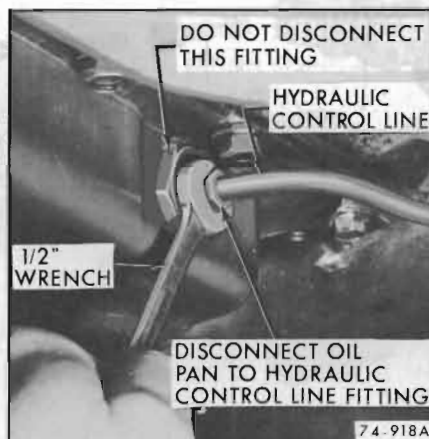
Disconnecting Hydraulic Control Line Fitting
